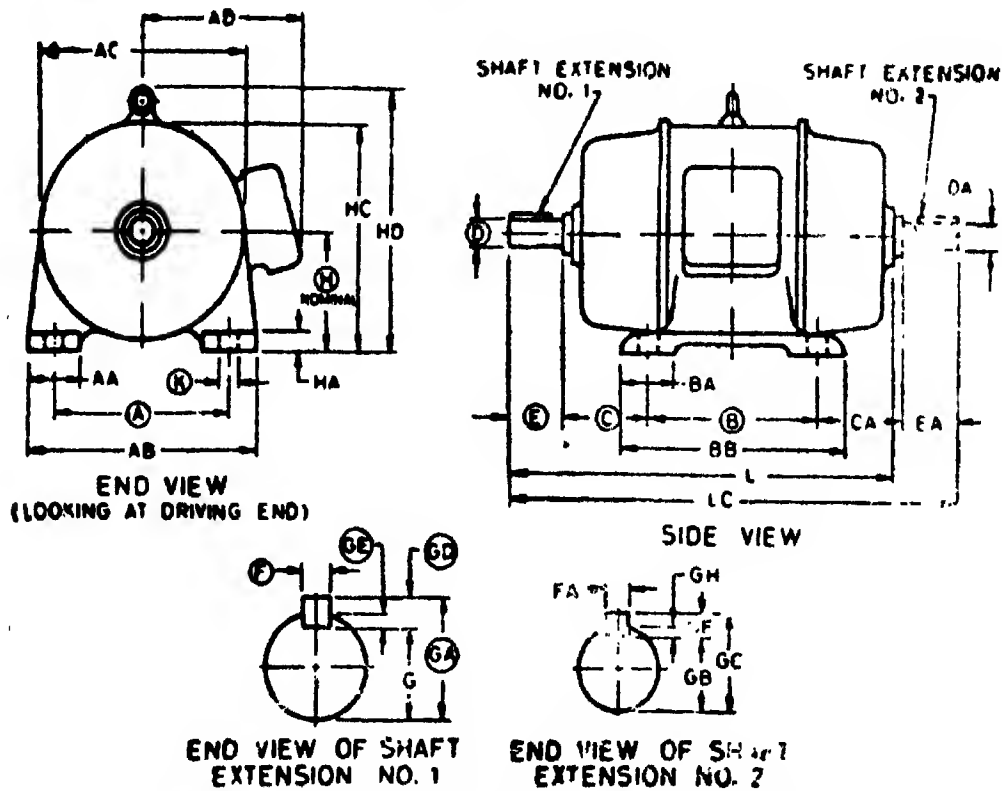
Standardized and other dimensions for foot mounted motors.
